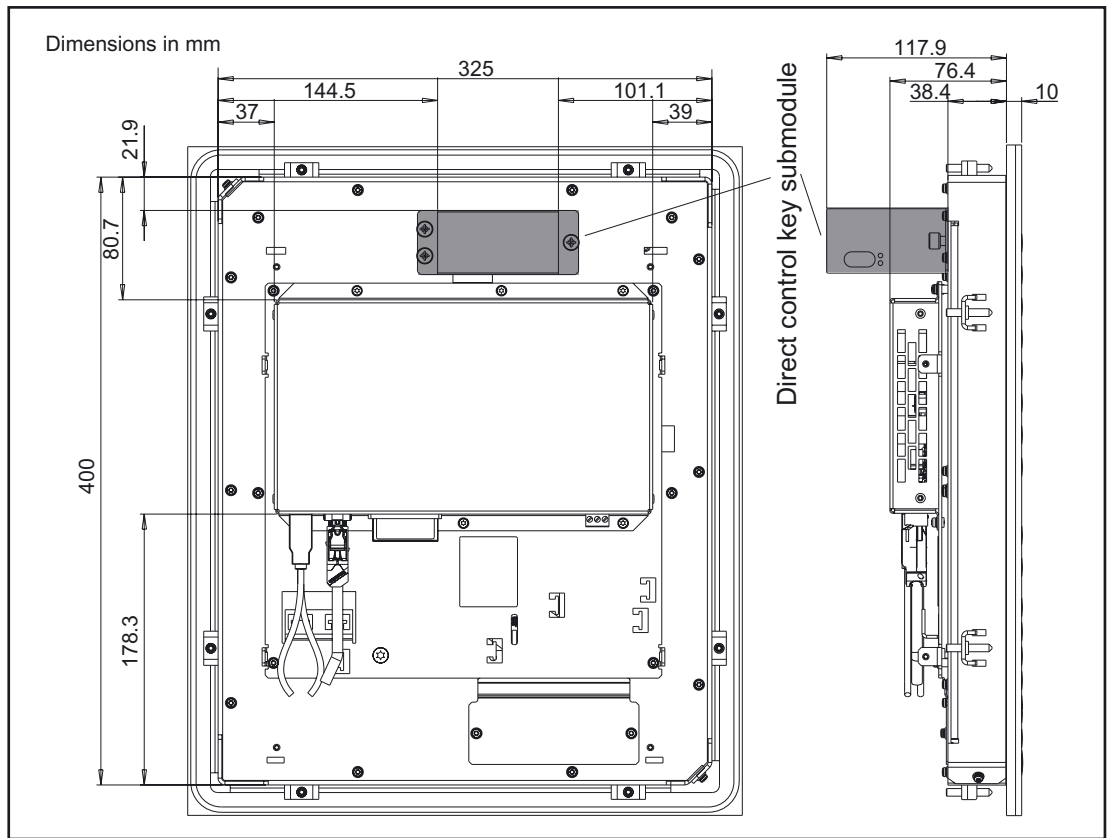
Dimensional drawing of OP 012T with direct control key module already installed
